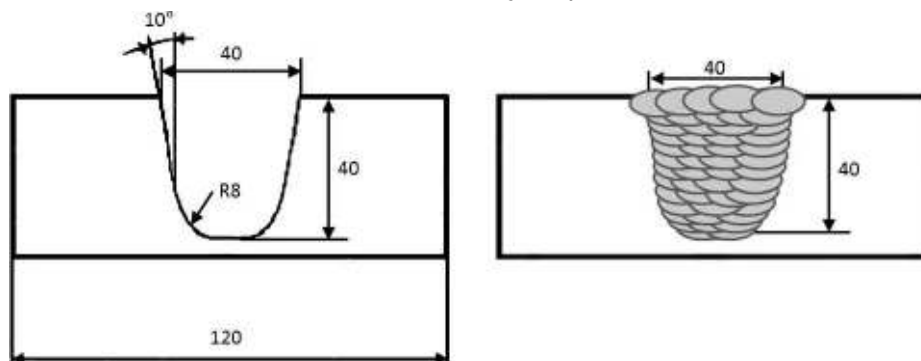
Joint preparation and layer sequence of CB2 weld
